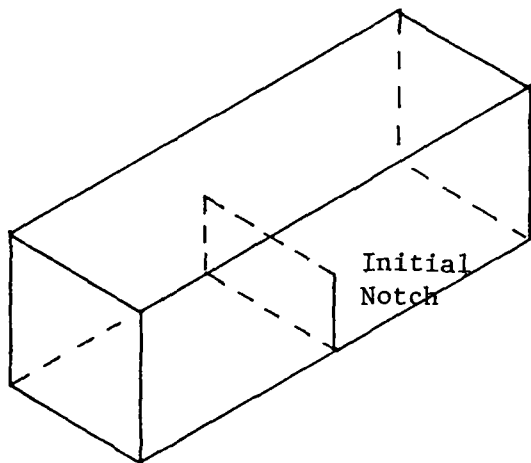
A Schematic of the Three-Point Bending Test specimen Showing the initial notch geometry.
